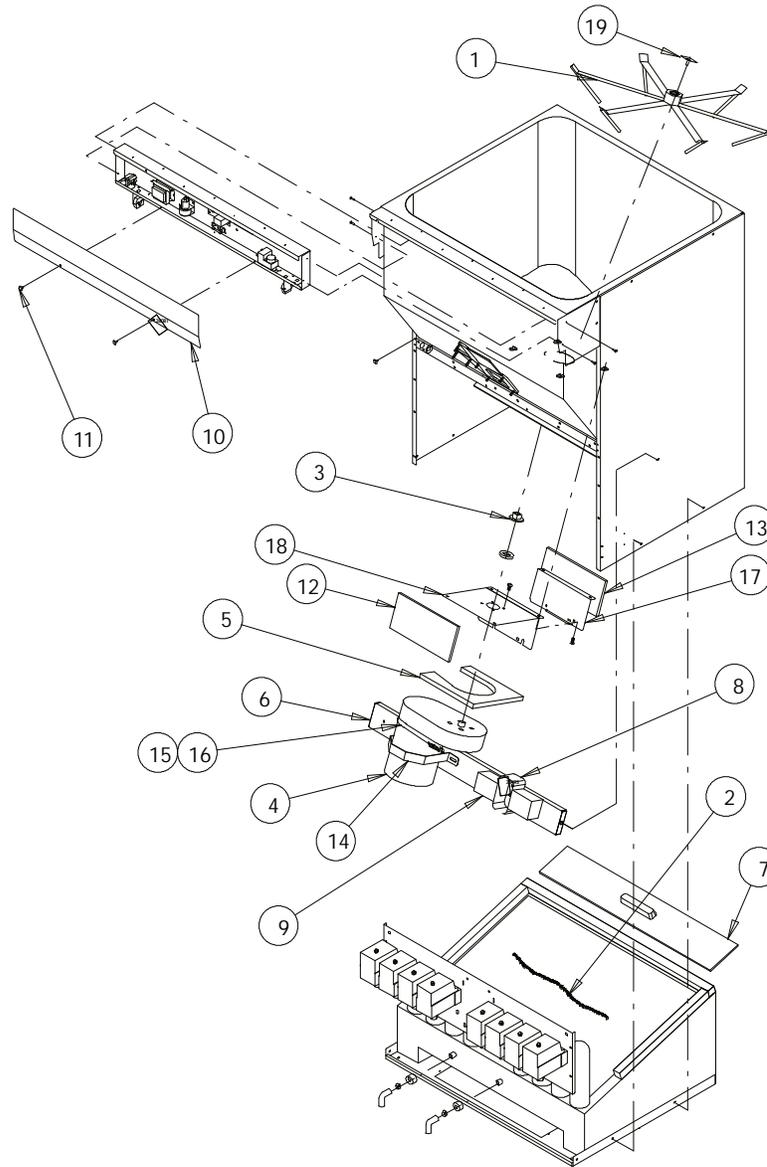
CABINET/ICE BIN ASSEMBLY EXPLODED VIEW AND PART LIST
